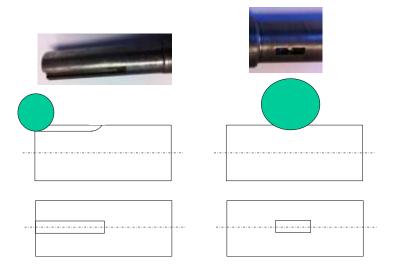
Several keyways. (a) Keyways in the shaft and the lager worm gear shown in Chapter 1 (note that the left one is made by a side-mill cutter while the other by a
